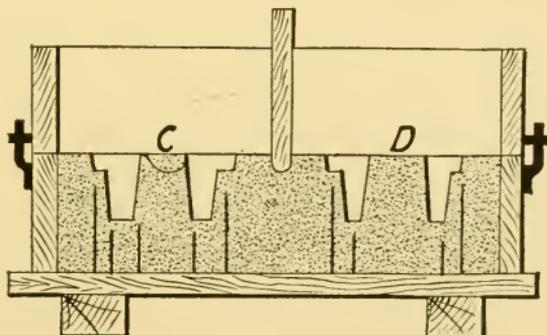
Cope and sprue set when making hexagonal nut mold.
